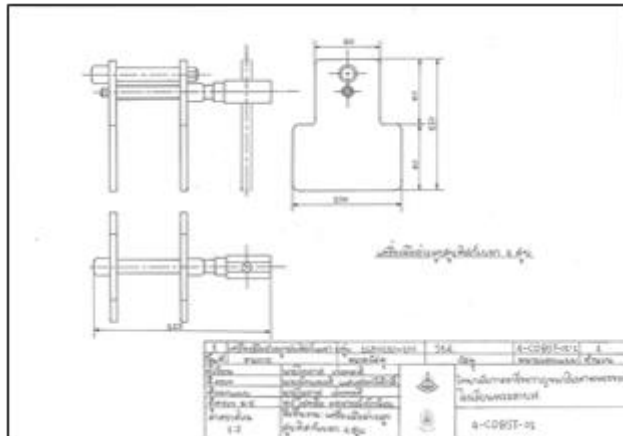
Drawing of special tool in project course for actual work in the workplace.
